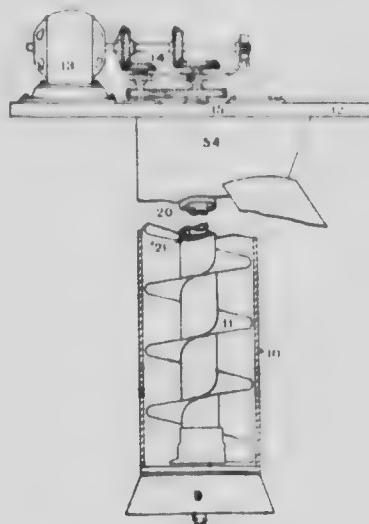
Parts of peat cutting apparatus: loosening device, screw conveyer, and motor.
